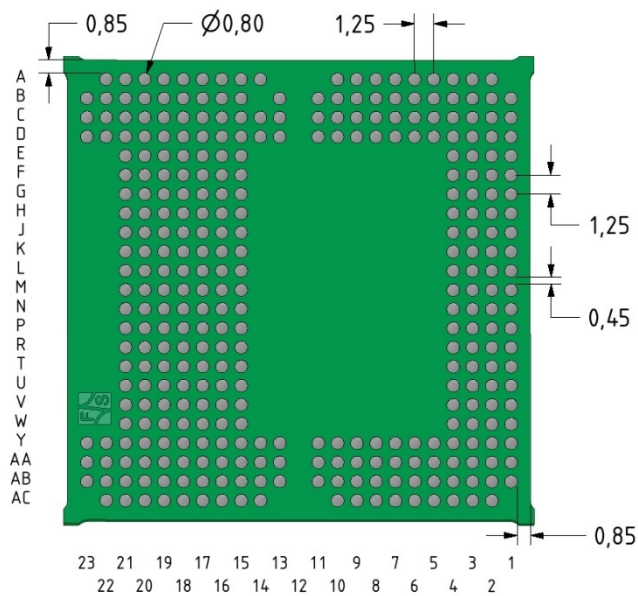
OSM8MM bottom view with pin numbers, all dimensions in mm
